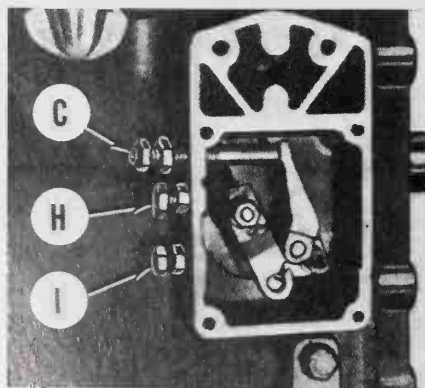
Turn screw (I) to adjust low idle speed and screw (H) to adjust high idle speed. Torque control screw (C) must be adjusted as outlined in text.
